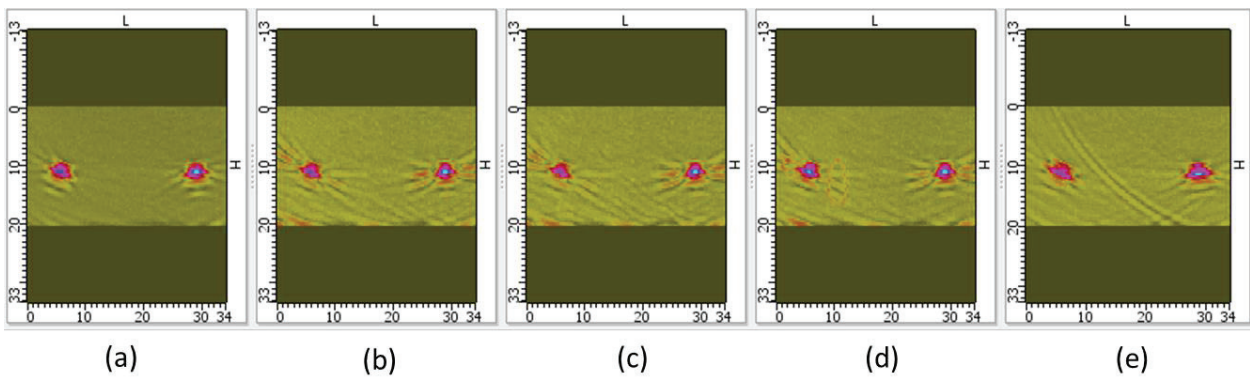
TFM imaging of flaws for the butt weld surface: theoretical surface (a) surfaces estimated in pulse-echo (b), in pitch-catch (c), with SAUL (d), with TFM (e).
